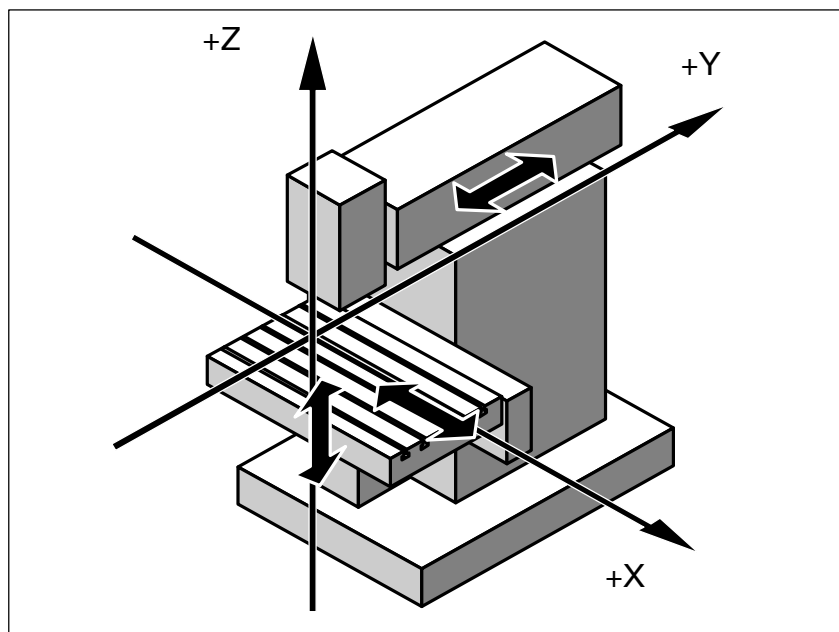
Machine coordinates/machine axes using the example of a milling machine
